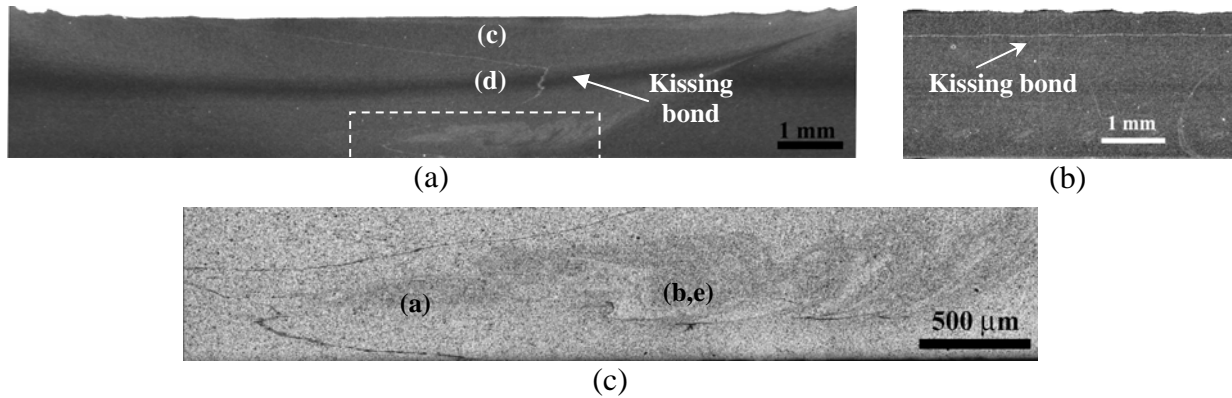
Macrographs for the DC1 weld etched in Keller's reagent showing (a) the weld face, (b) longitudinal section along the weld centreline, (c) magnified view of the dashed box in (a)
